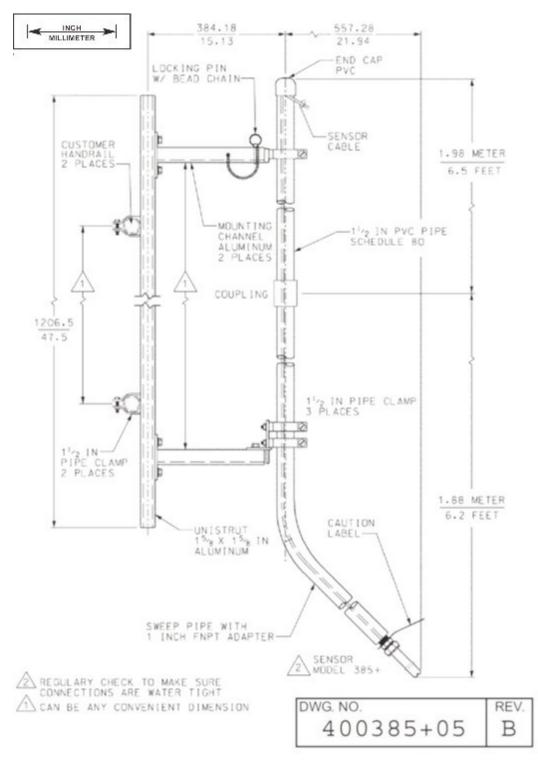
Submersion Installations, Handrail Mounting Assembly (P/N 11275-01)
